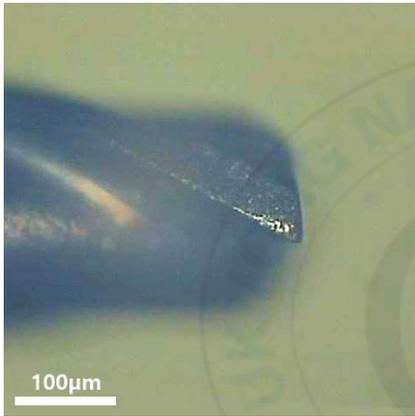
Width of flank wear at end cutting edge of micro end mill
